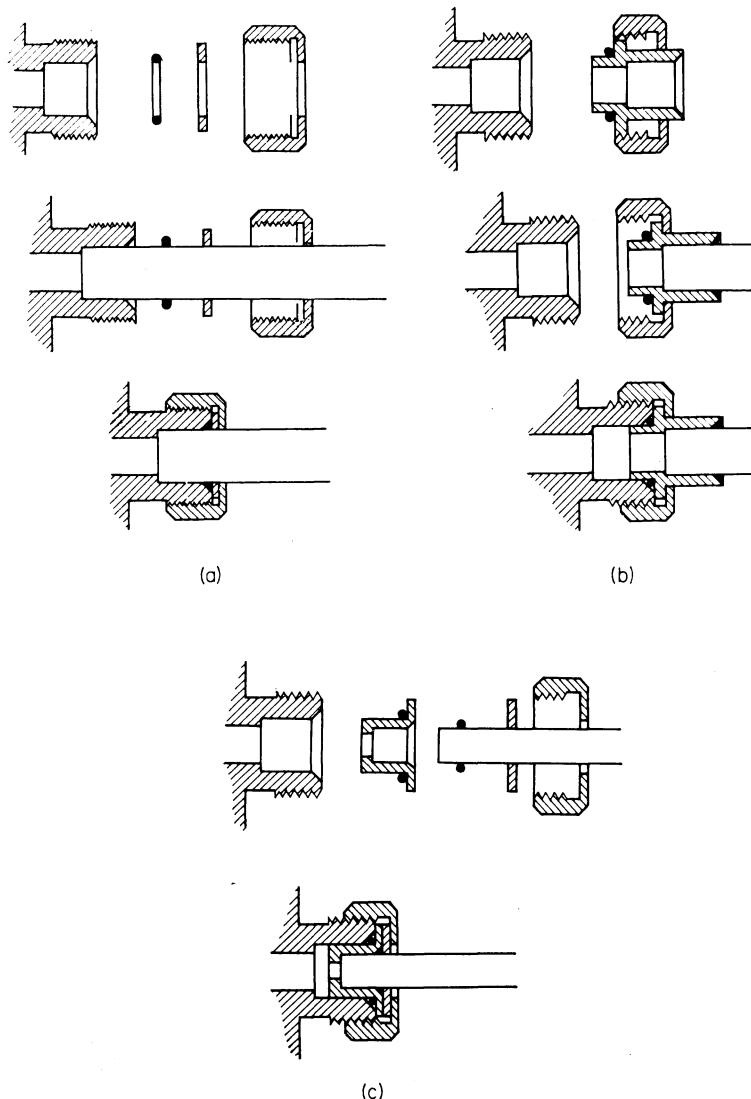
Systems of closing conical O-ring seals (*Courtesy of Genevac⁴⁴²*)
